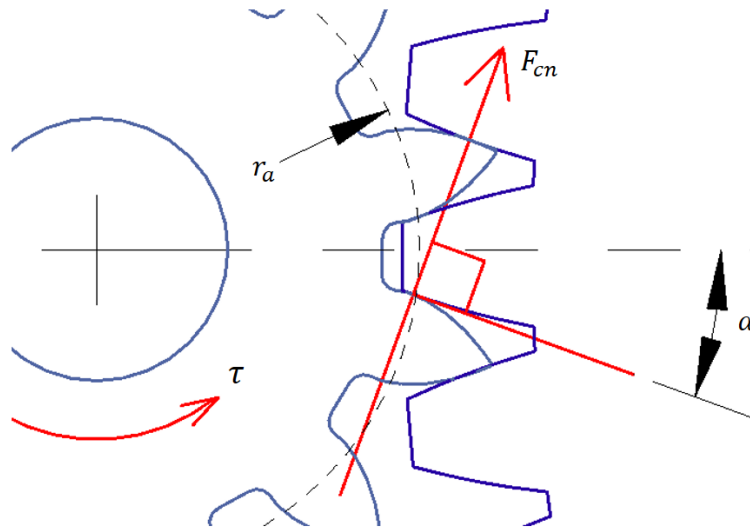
Normal load on the tooth flank due to tooth pressure angle.
